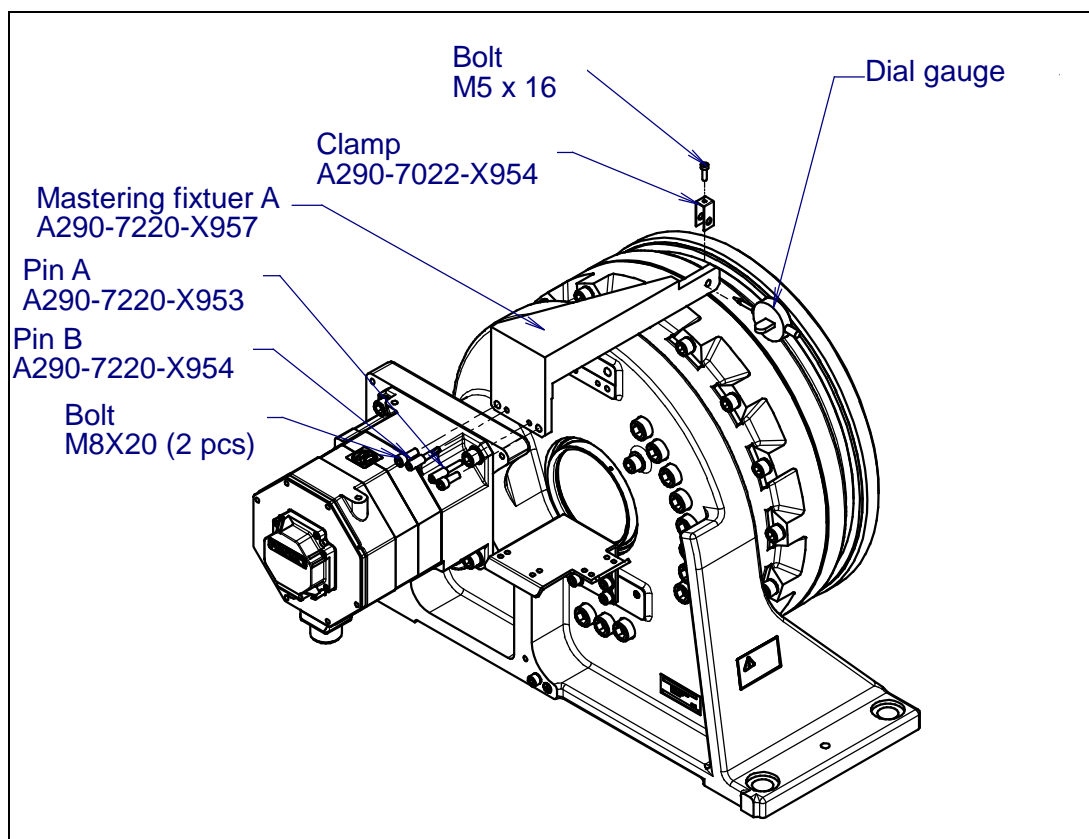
(c) Attaching the mastering fixture to the 1-axis positioner (1000kg/1500kg payload (Hollow type))
